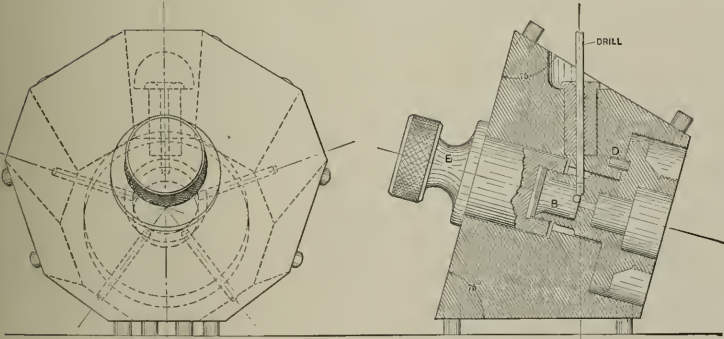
Jig for Drilling Angular Holes in Percussion Fuse.
